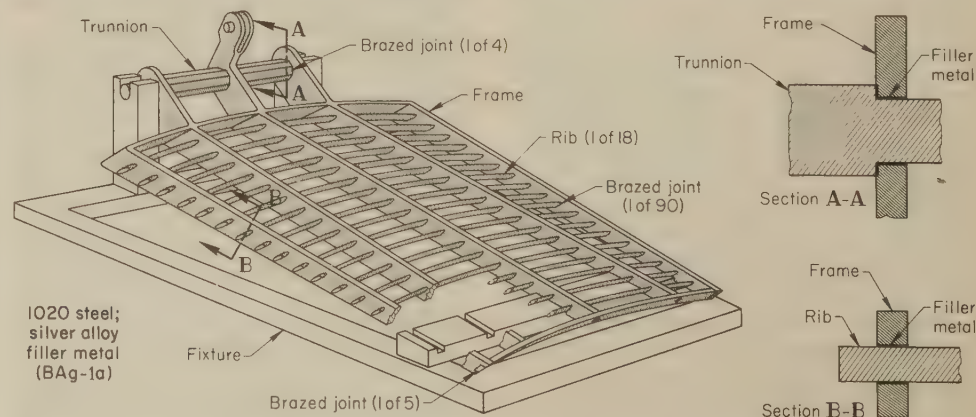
Fixture for torch brazing gas turbine air-inlet screen, the assembled screen, and location of brazed joints (Example 575)
